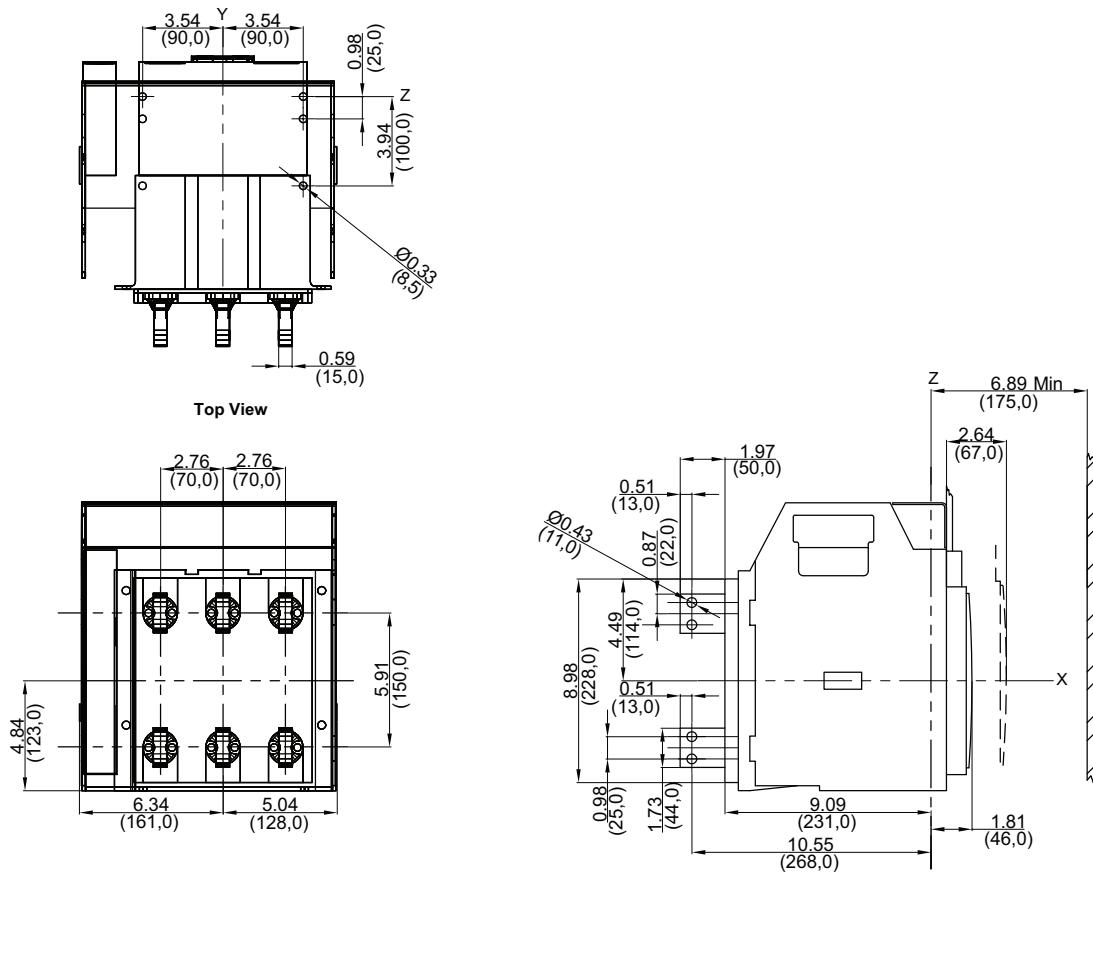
800-1600 A MasterPact NT IEC Three-Pole Fixed—FCF Front-Connected FlatDimensions: in (mm)
